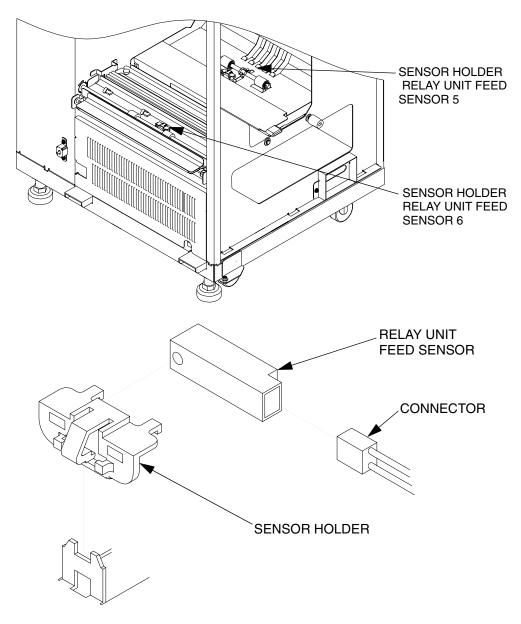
Removal of the Relay Unit Feed Sensor 5 and 6
